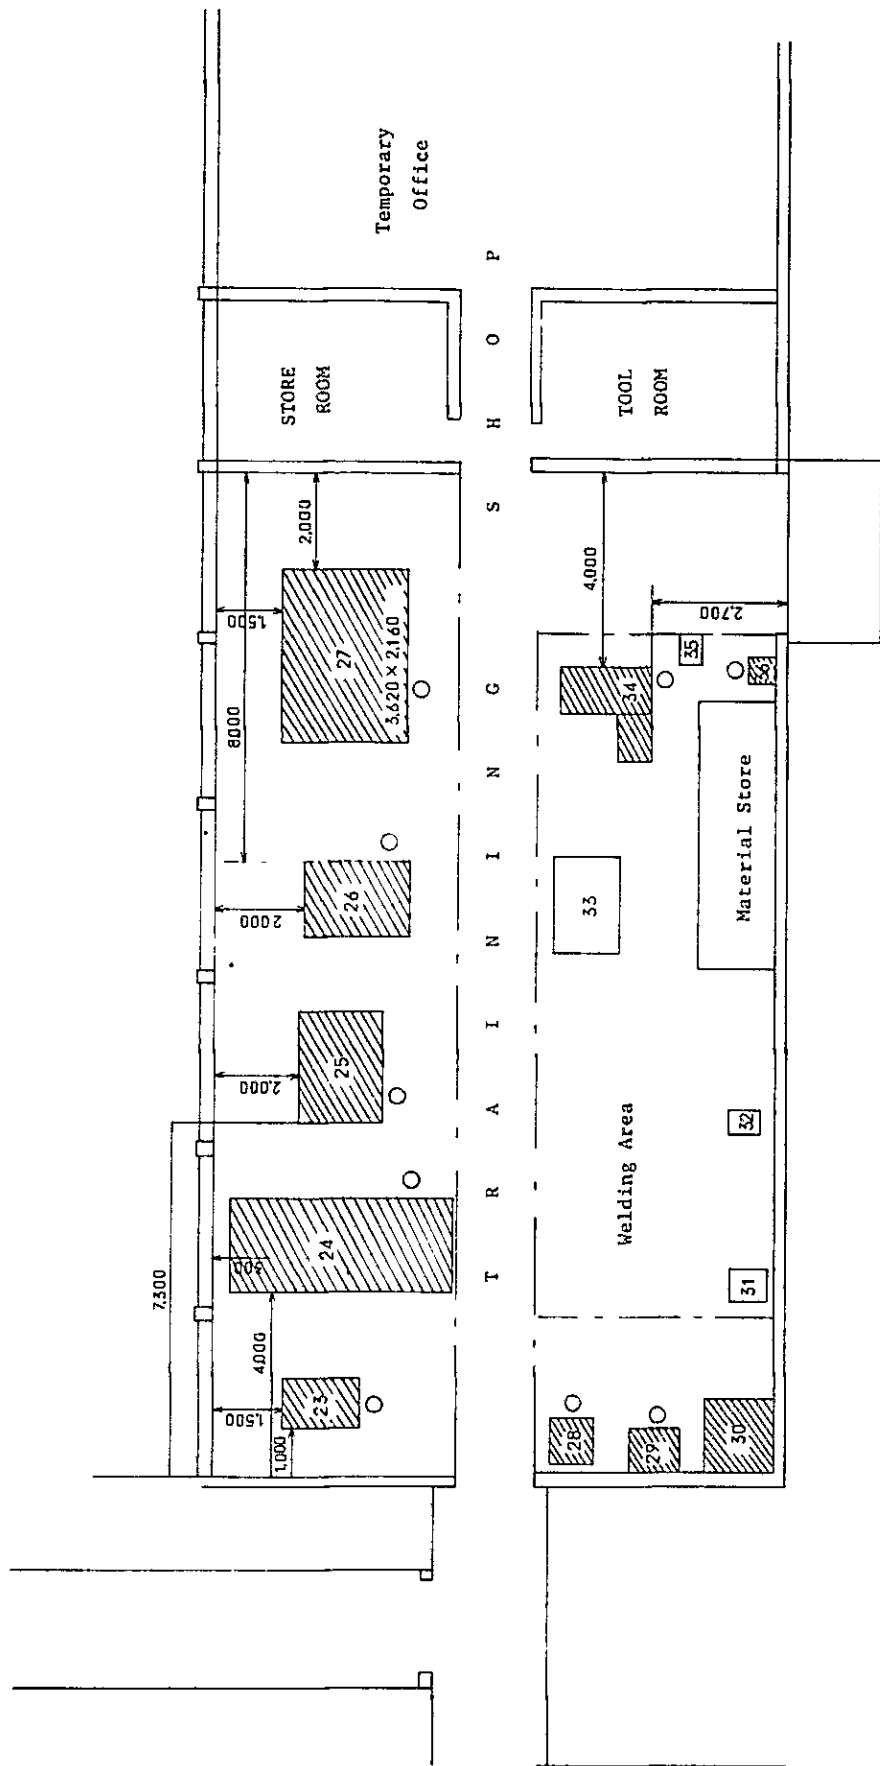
MACHINE LAYOUT PLAN (2) (Training shop)
